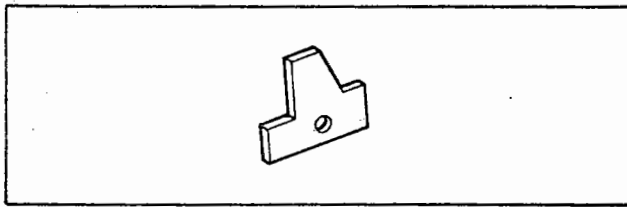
T25939 Enrichment Valve Screw Adjusting Assembly Gage
